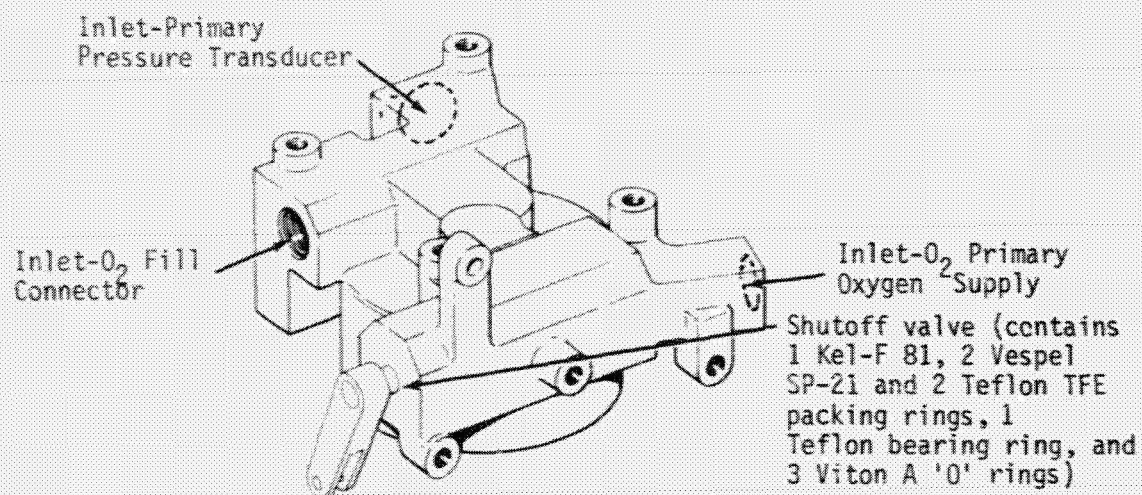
Primary Oxygen Regulator Assembly.
